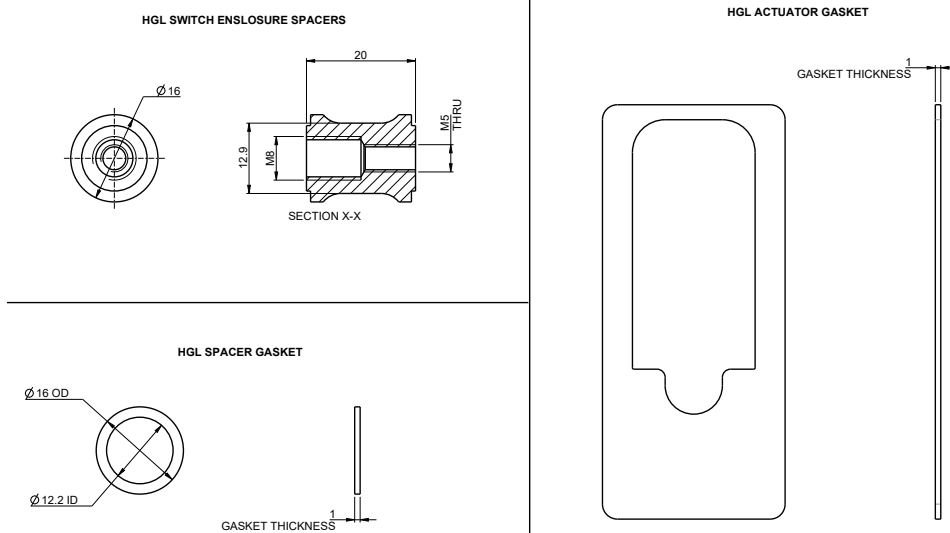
HGL-HM Mounting Kit Components Dimensional Drawing
